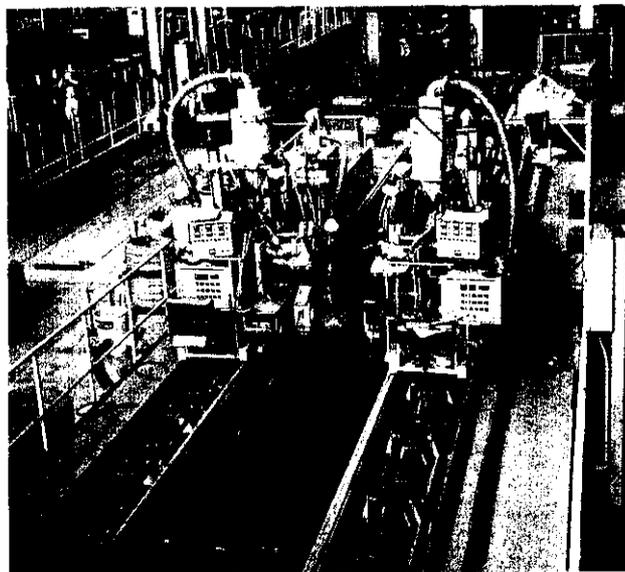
3-electrodes SAW (3KX) apparatus for corner seam welding
